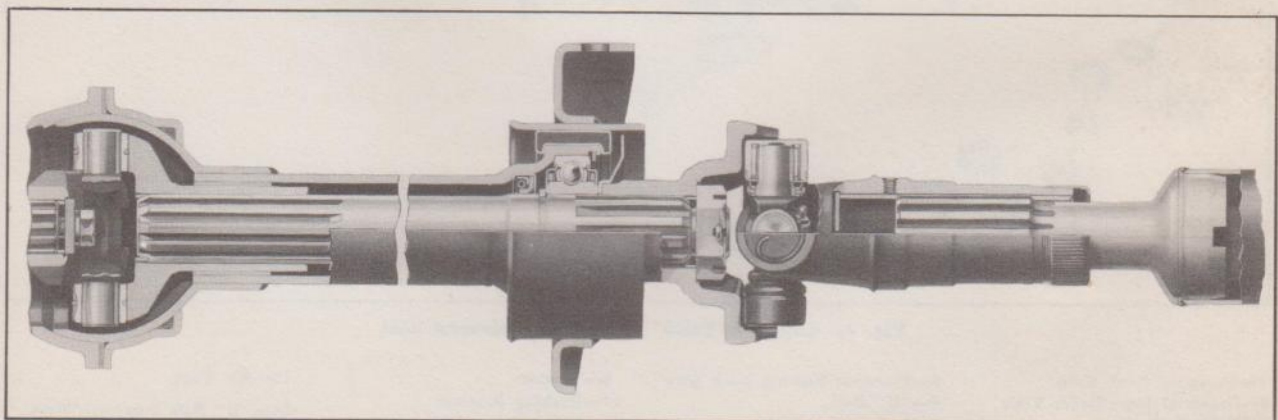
$\frac{3}{4}$ Ton Truck Front Propeller Shaft Assembly
